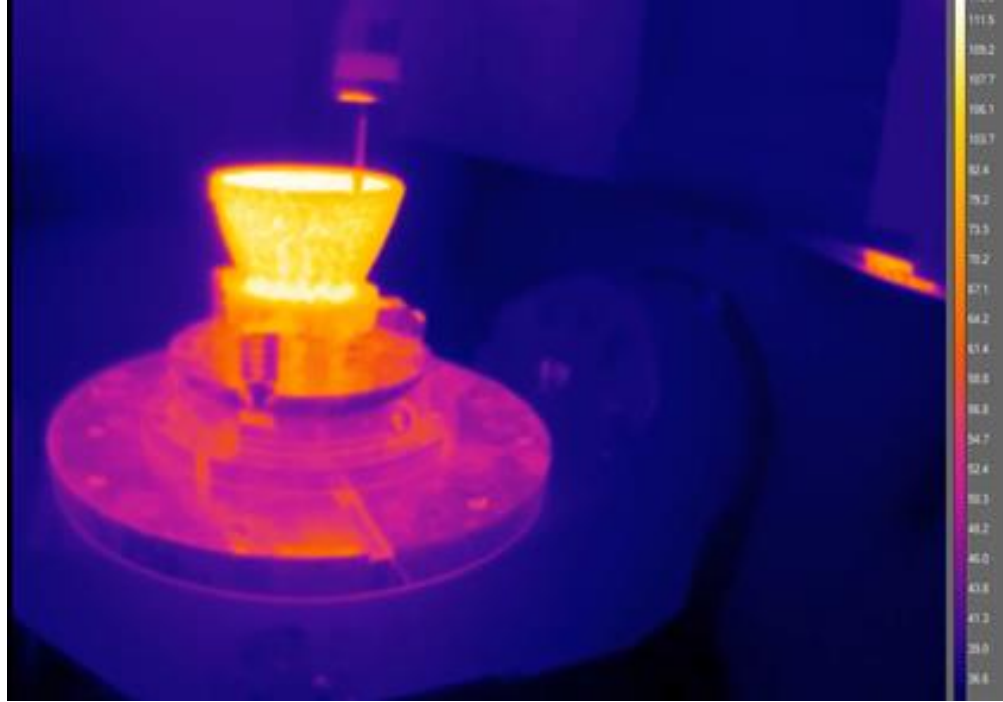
Conical Structure Fabricated with Mazak Hybrid Machine
